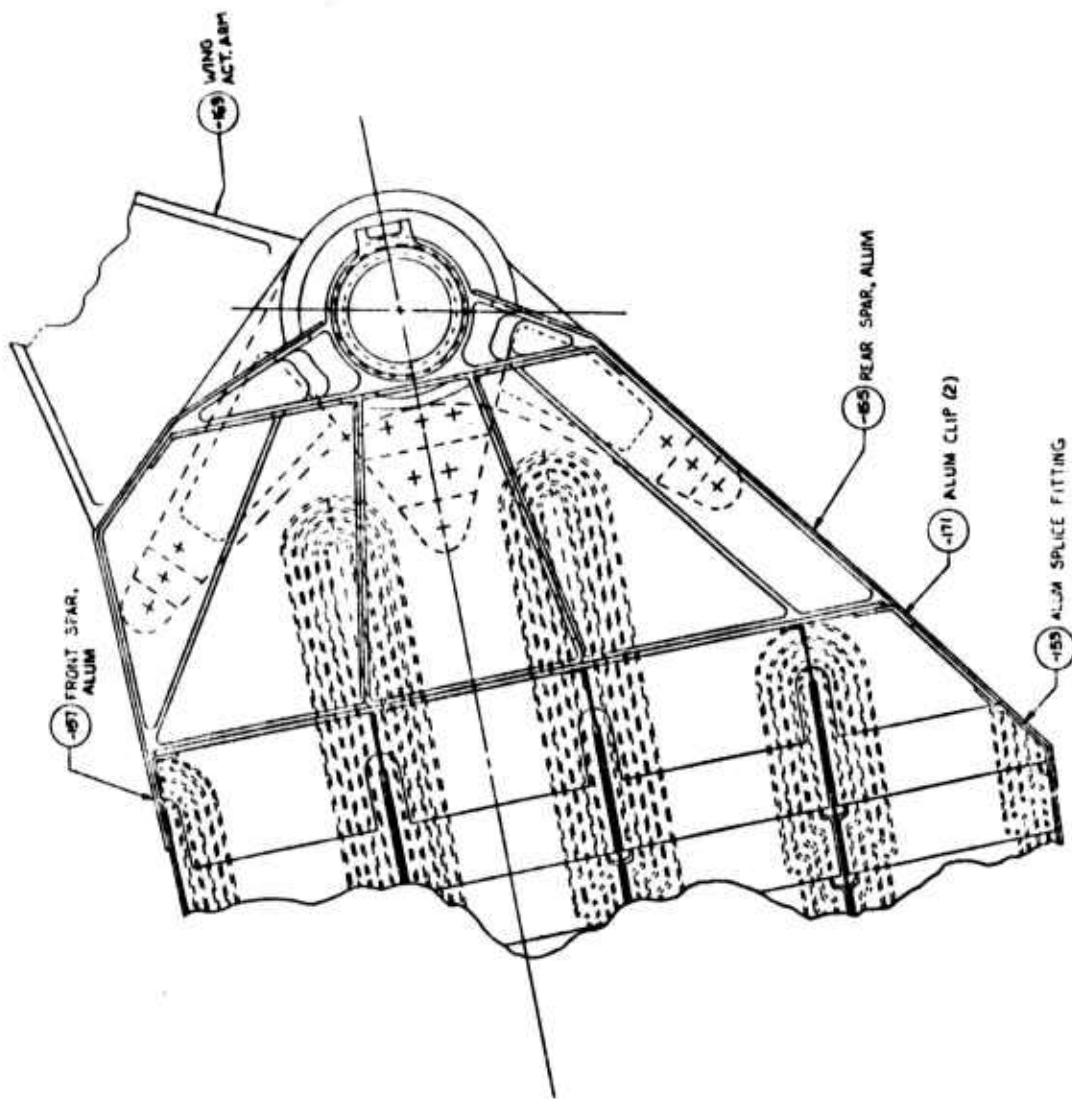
633RW002-1 Pivot Fitting (Sheet 1 of 2)
